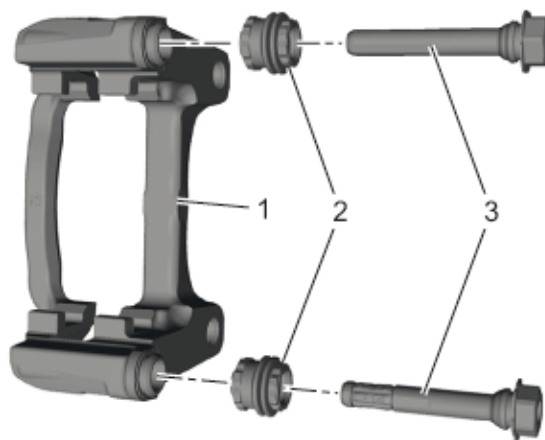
Brake Caliper Guide Pins, Boots And Caliper Mounting Bracket
